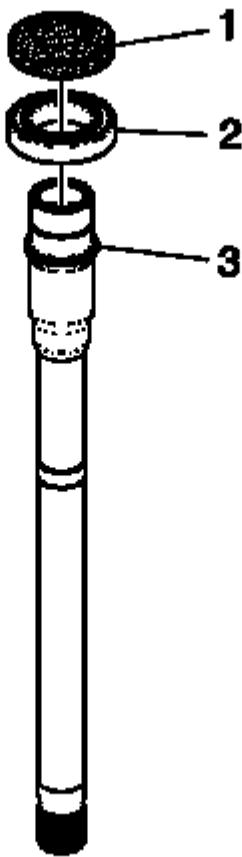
View Of Intermediate Shaft Bearing And Bearing Installer
